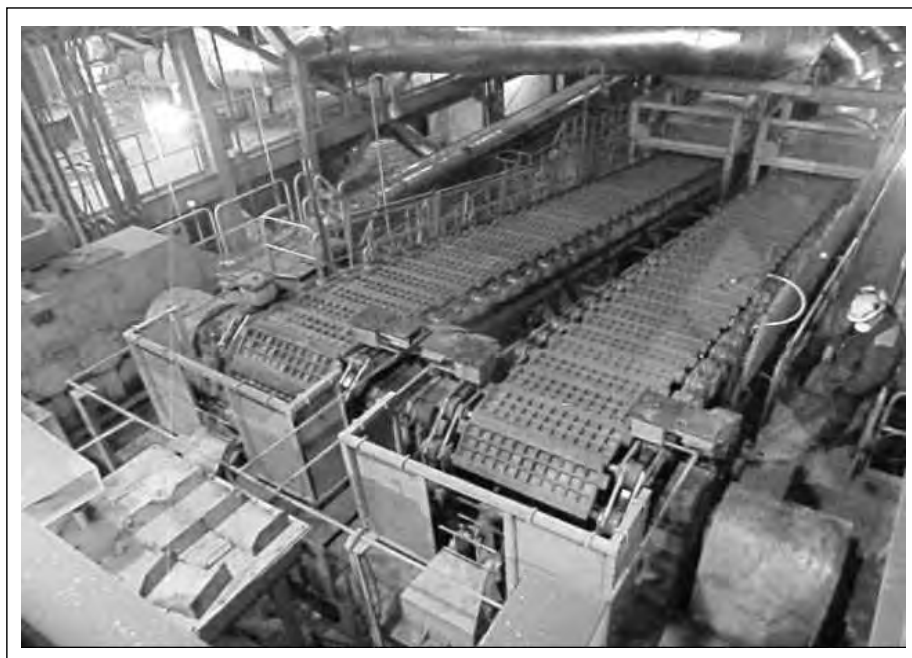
Slag casting machine designed by Engineering Dobersek GmbH
